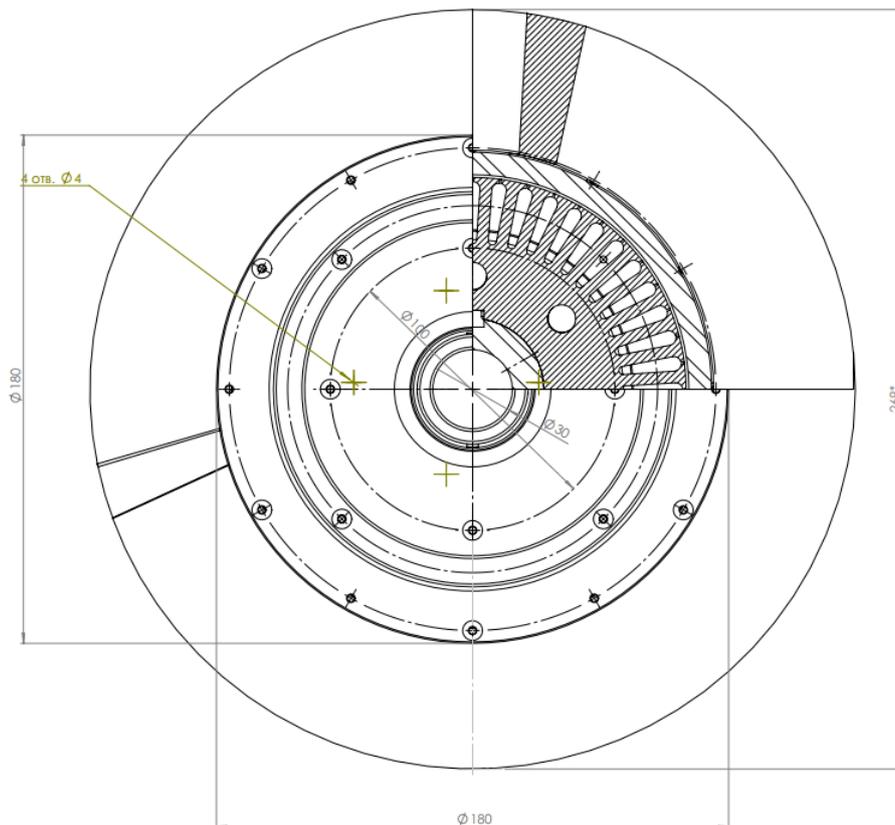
Assembly drawing of a screw-type multifunctional converter (view 2)
